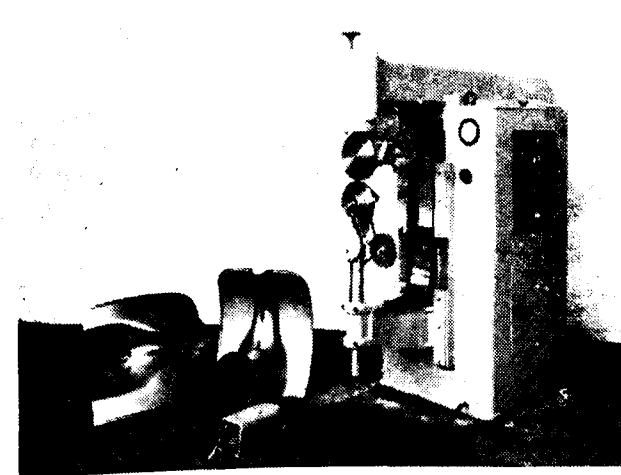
Resistance welding machine for foil butt seams with working samples.
